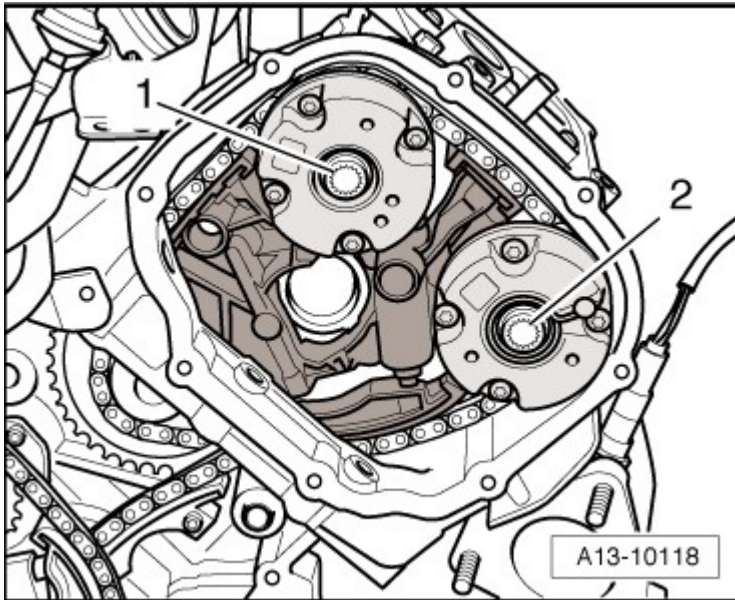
Identifying Bolts For Camshaft Adjuster Using Multipoint Socket T10035
